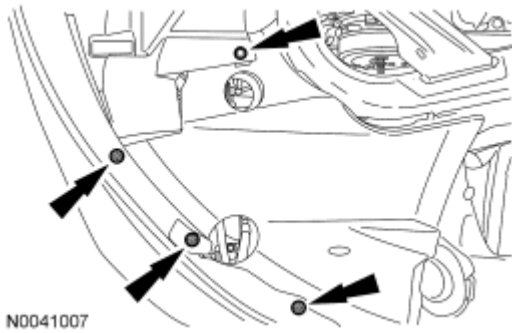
Locating LH Fender Splash Shield Screws
